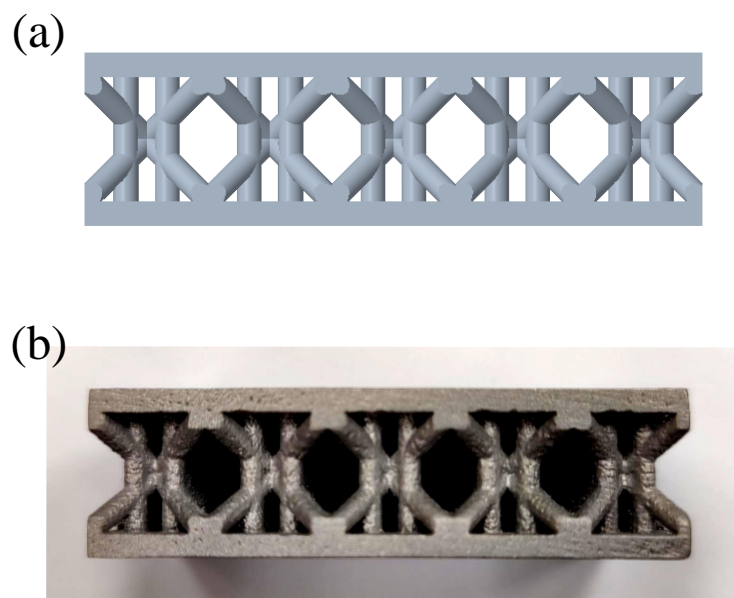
The specimen manufactured by SLM. (a) CAD model of the specimen; (b) the BCC4IZ specimen.
